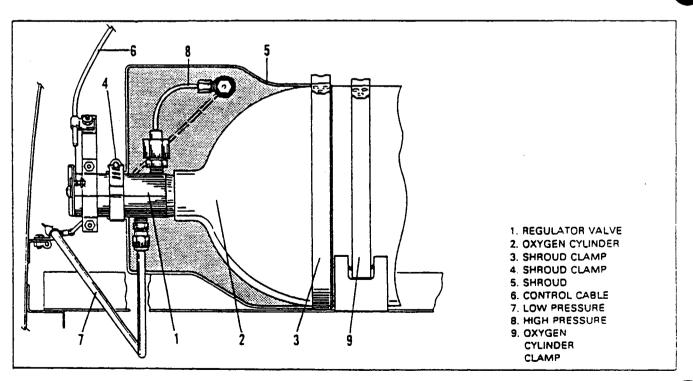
Oxygen Cylinder and Regulator Assembly
